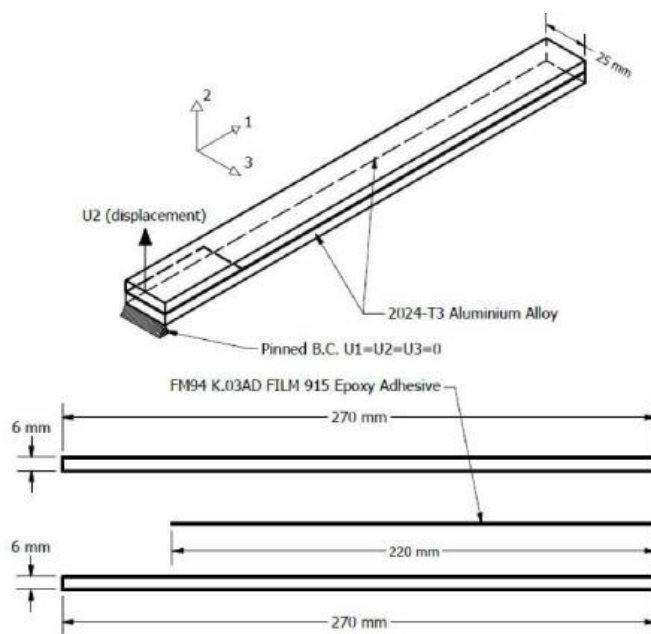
DCB dimensions, assembly and boundary conditions [4]
